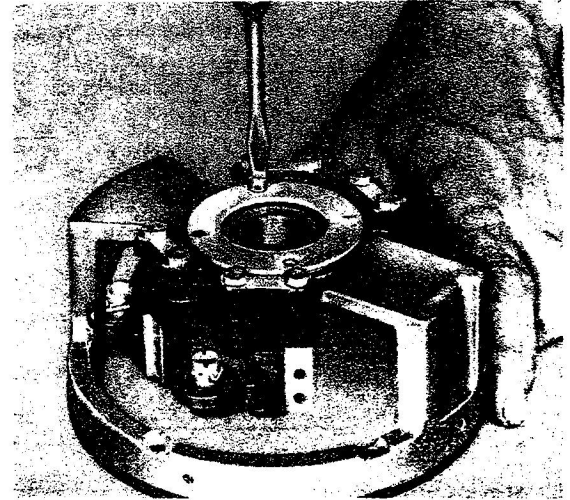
Removal of Front Head Ball Bearing Retainer
